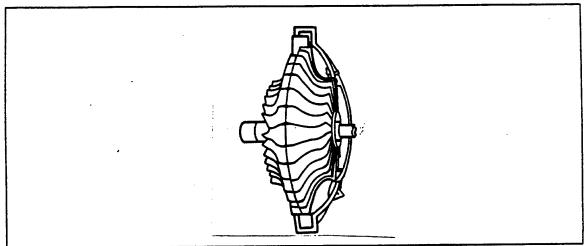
DOUBLE-ENTRY COMPRESSOR IMPELLER
